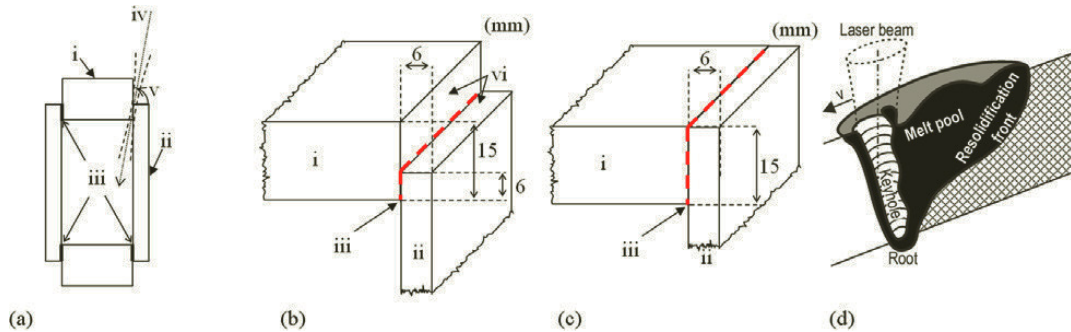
(a) Cross section of the beamer, here with (b) an eccentric corner joint. (c) butt joint as an alternative (d) 3D-illustration of the melt pool in laser keyhole welding (here: butt joint) [Legend: (i) HS-steel Weldom 960, (ii) HS-steel Domex 700, (iii) joint to be welded, (iv) laser beam axis, (v) beam inclination angle, (vi) laser cut surfaces]
